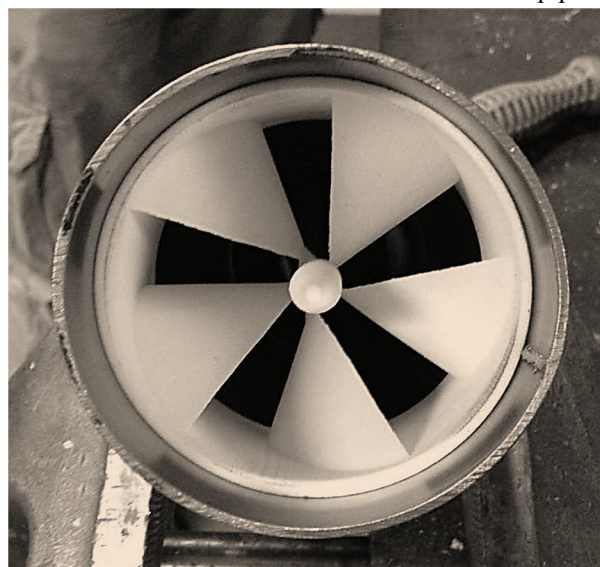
The image below shows a 3D-printed IGV device is fitted to the inlet duct of a compressor, revealing the inlet and impeller.
